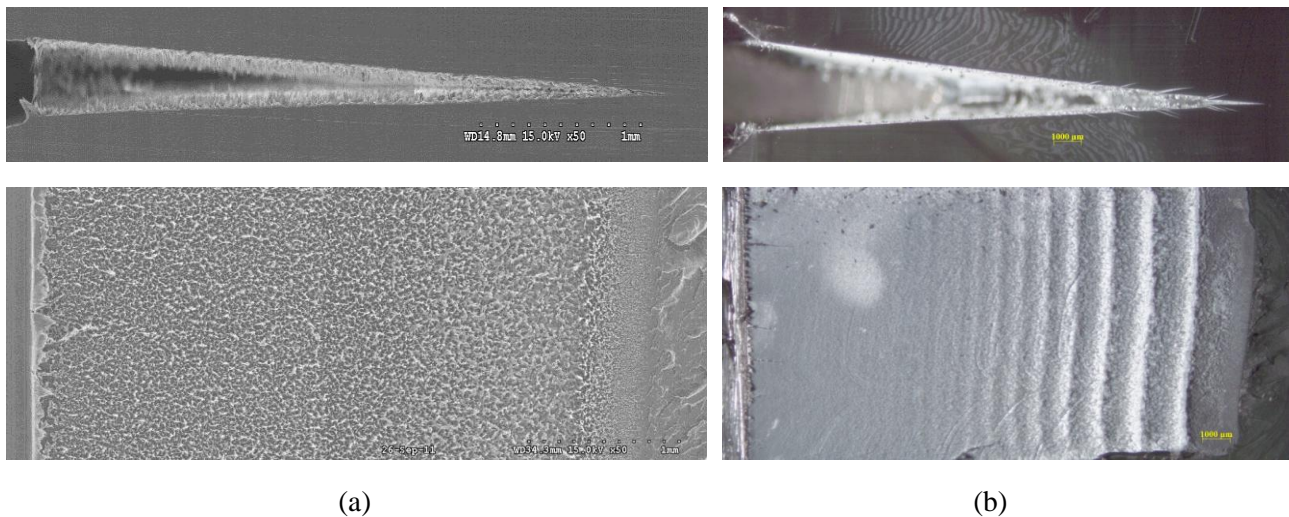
CT specimens tested at  $80^\circ\text{C}$  with initial  $K_0 = 10 \text{MPa} \cdot \sqrt{\text{mm}}$ : (a) tested for 290 hours, Upper: side view; Lower: fracture surface. (b) tested for 680 hours, Upper: side view; Lower: fracture surface.
